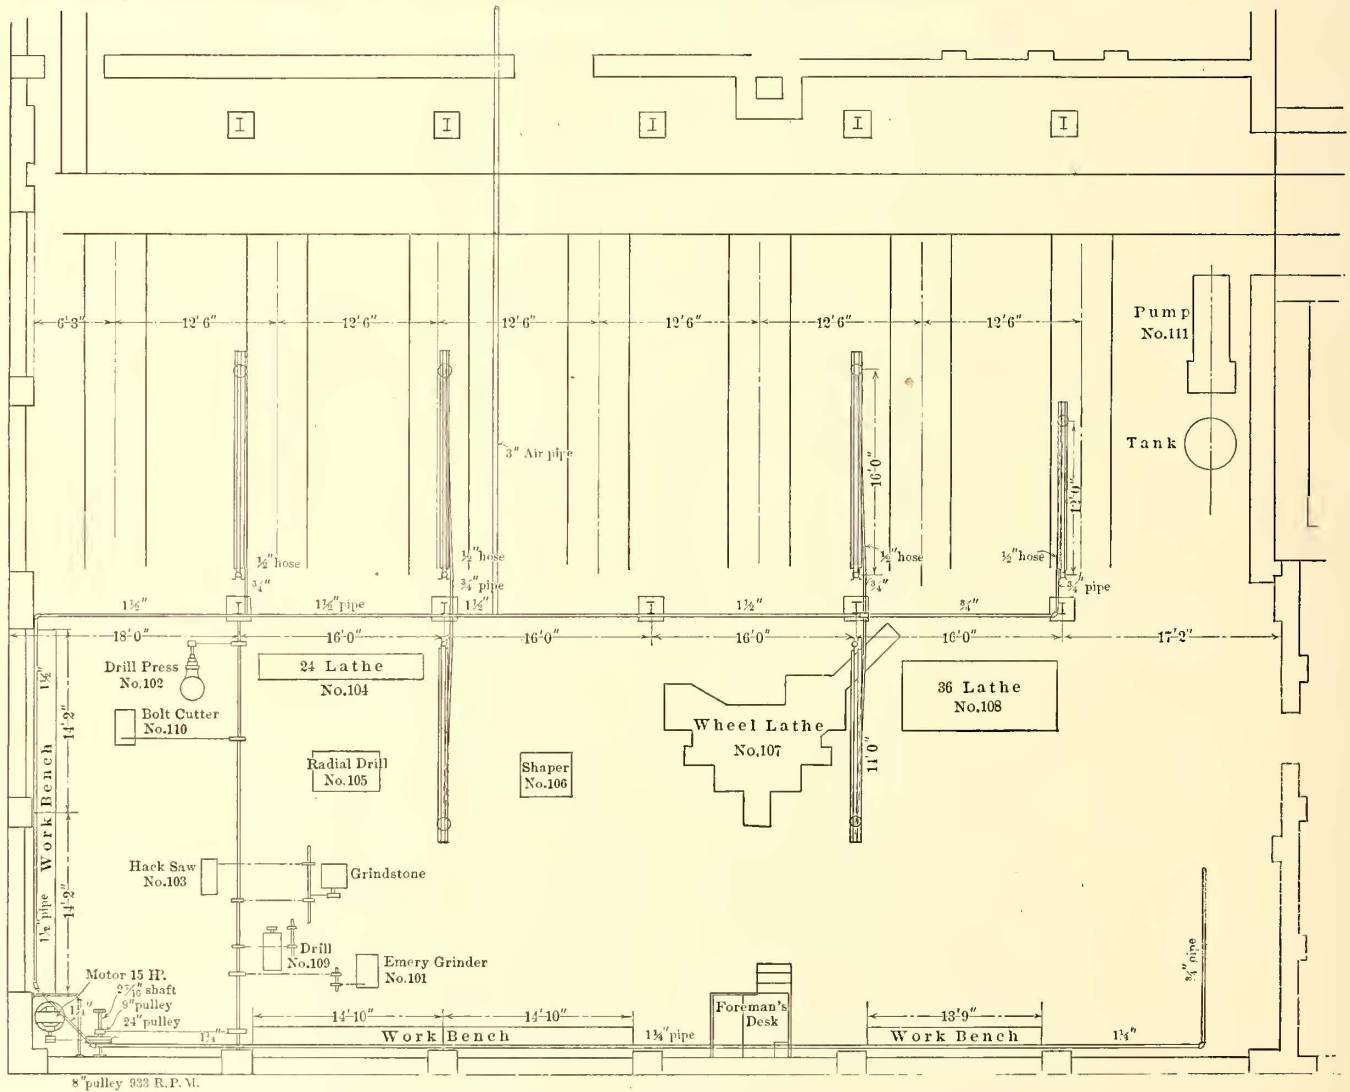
GENERAL PLAN OF OVERHAULING SHOP, SHOWING LOCATION OF OVERHAULING TRACKS, TOOLS, ETC.
